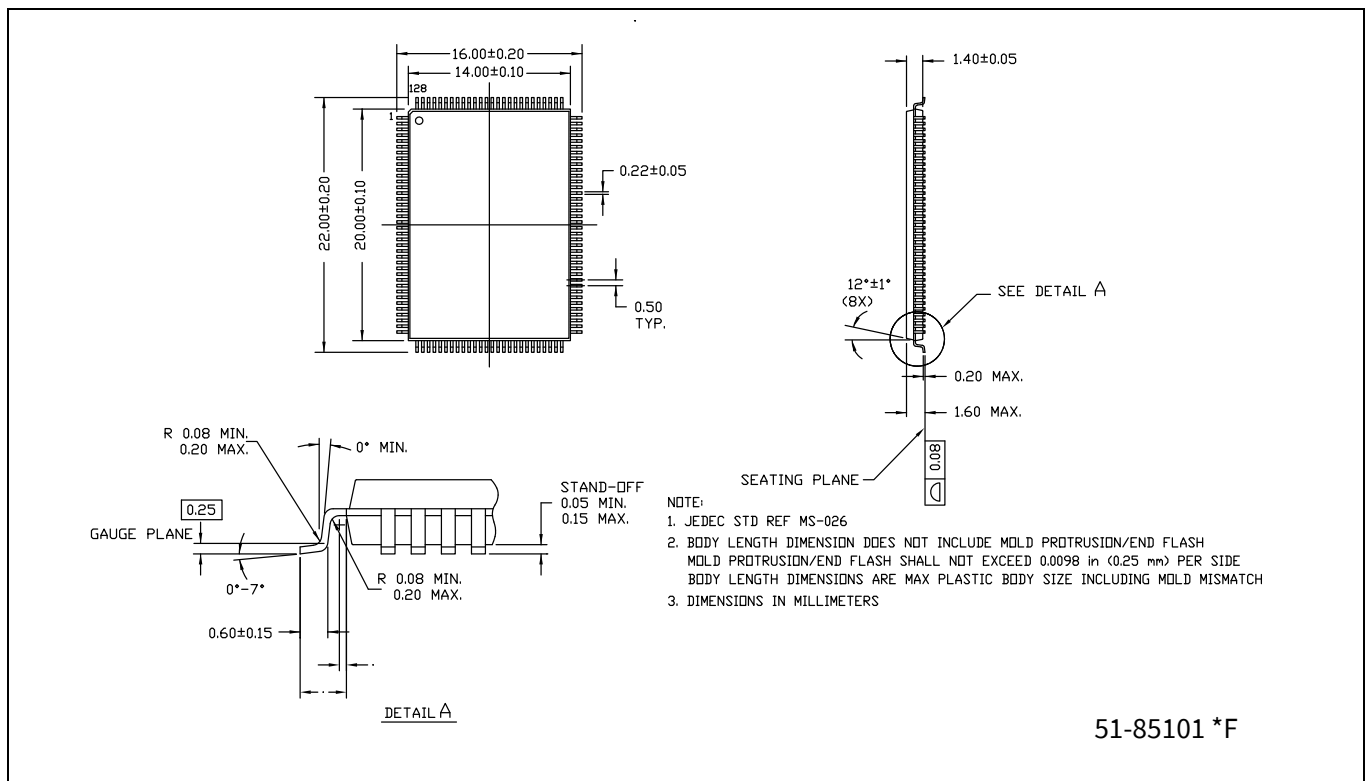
128-pin TQFP (14 × 20 × 1.4 mm) A128RA package outline, 51-85101
